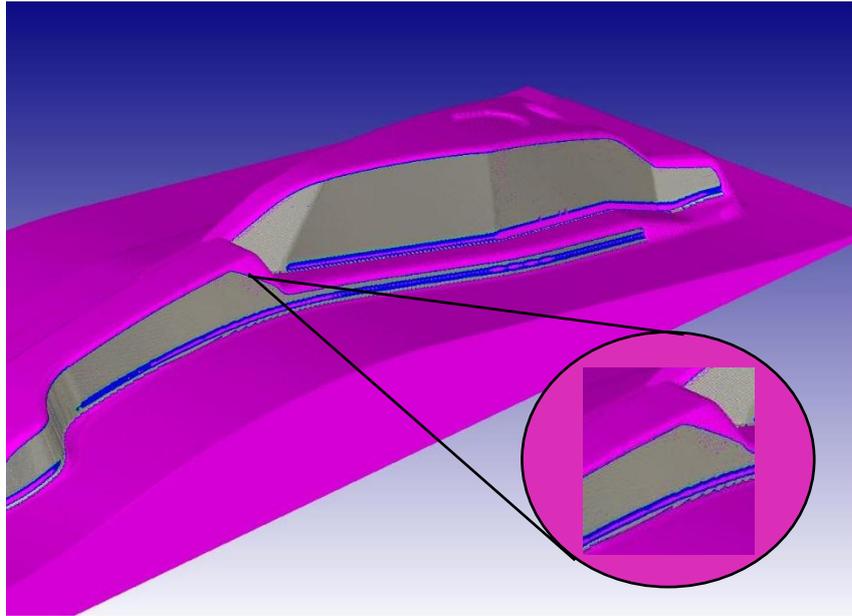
Finishing simulation with a 3+2-axes conical barrel cutter CNC machine.
